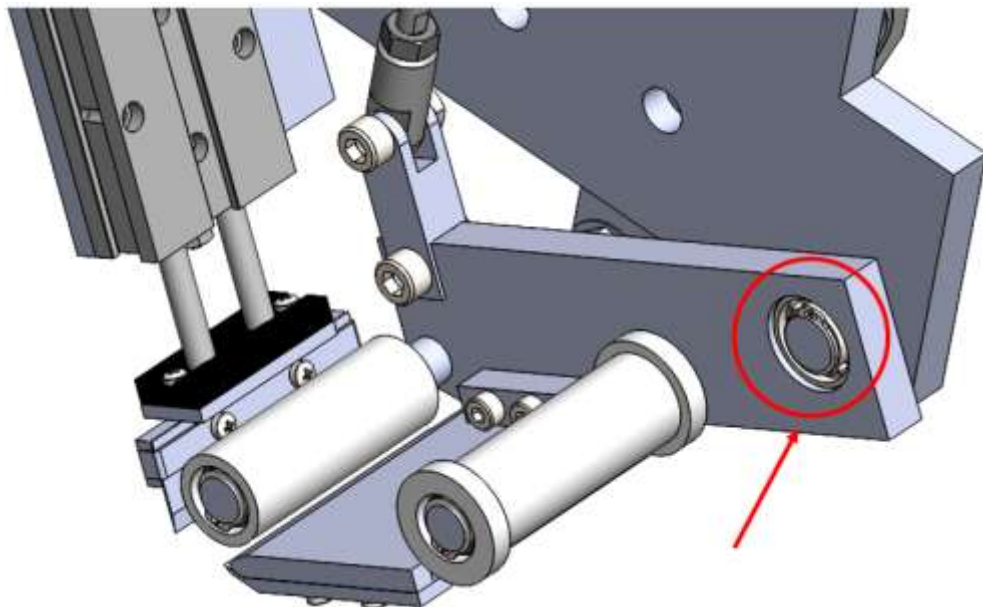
Bearing selection for rotating unit in tape sticking mechanism
